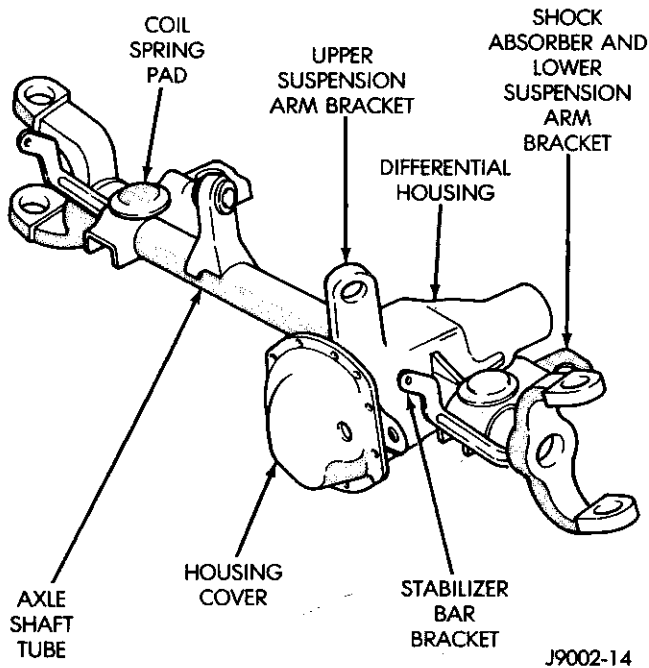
Selec-Trac Front Axle — MJ/XJ
